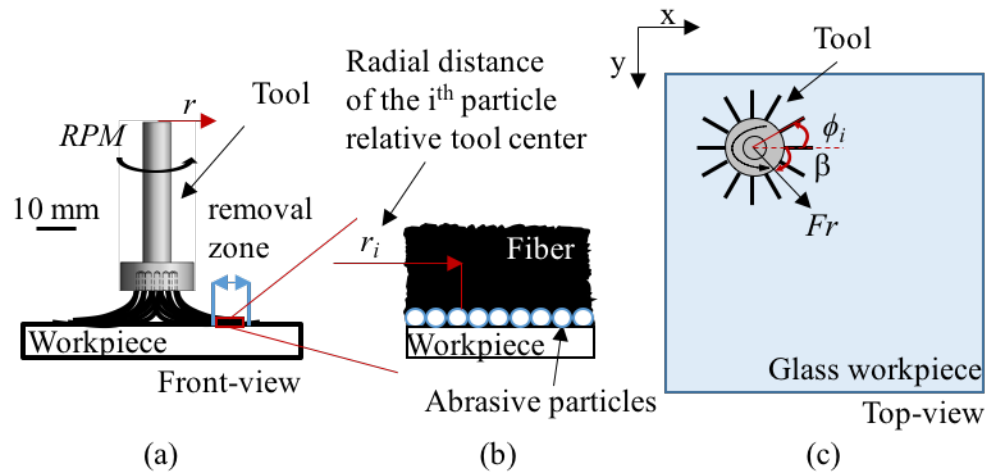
Fiber-abrasive-workpiece interaction snapshot; (a) front view of tool engaged with workpiece (b) close-up view of fiber particle engagement (c) top-view coordinates of the tool
